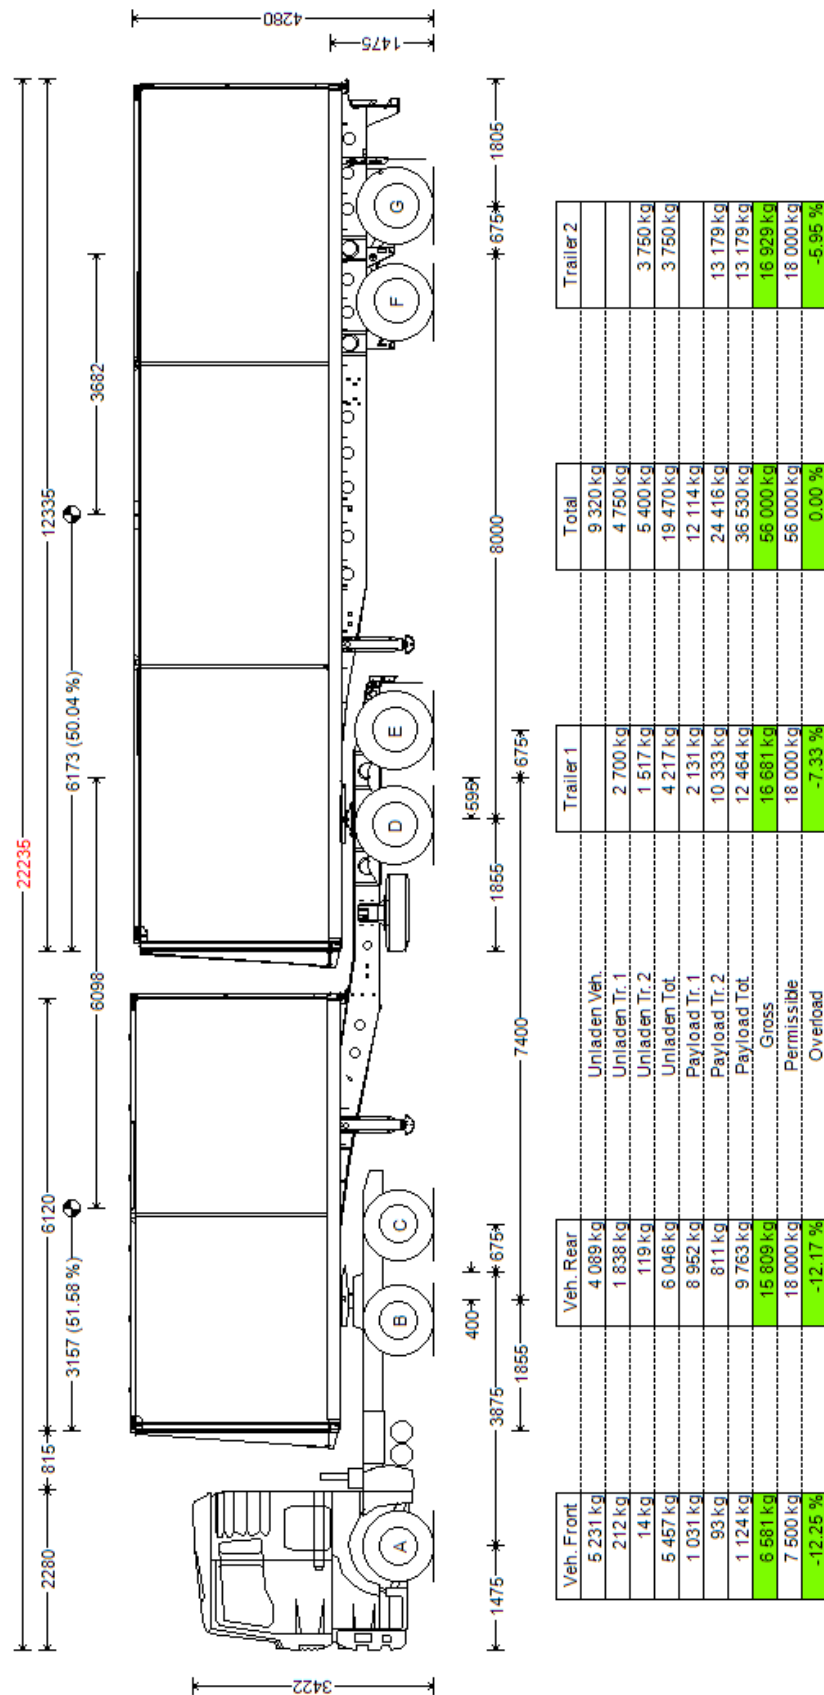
Layout dimensional drawing of the Side curtain B-double configuration
